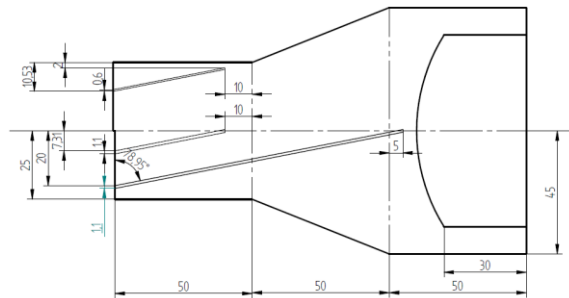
Quenching assembly shouldered shaft including drilling for thermocouples
